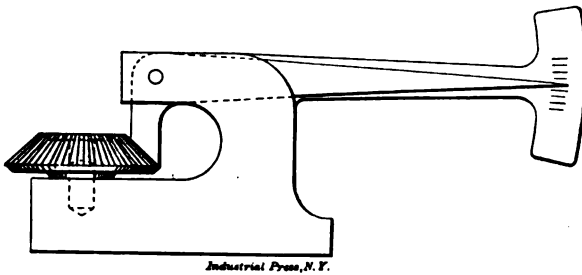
shows a very simple, but at the same time, a very ingenious tool for measuring angles. Strictly speaking, the tool is not intended
